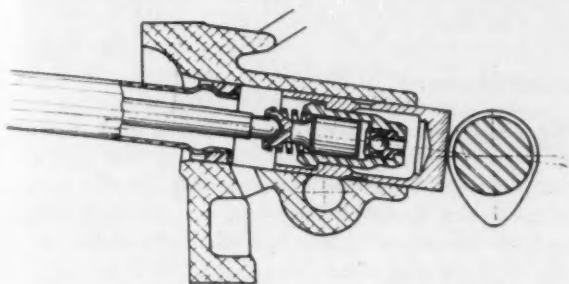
shows a production application in a light air-cooled aircraft engine. A  $\frac{7}{16}$ -in. unit is shown installed in the tappet, the pushrod socket being integral with the plunger.
